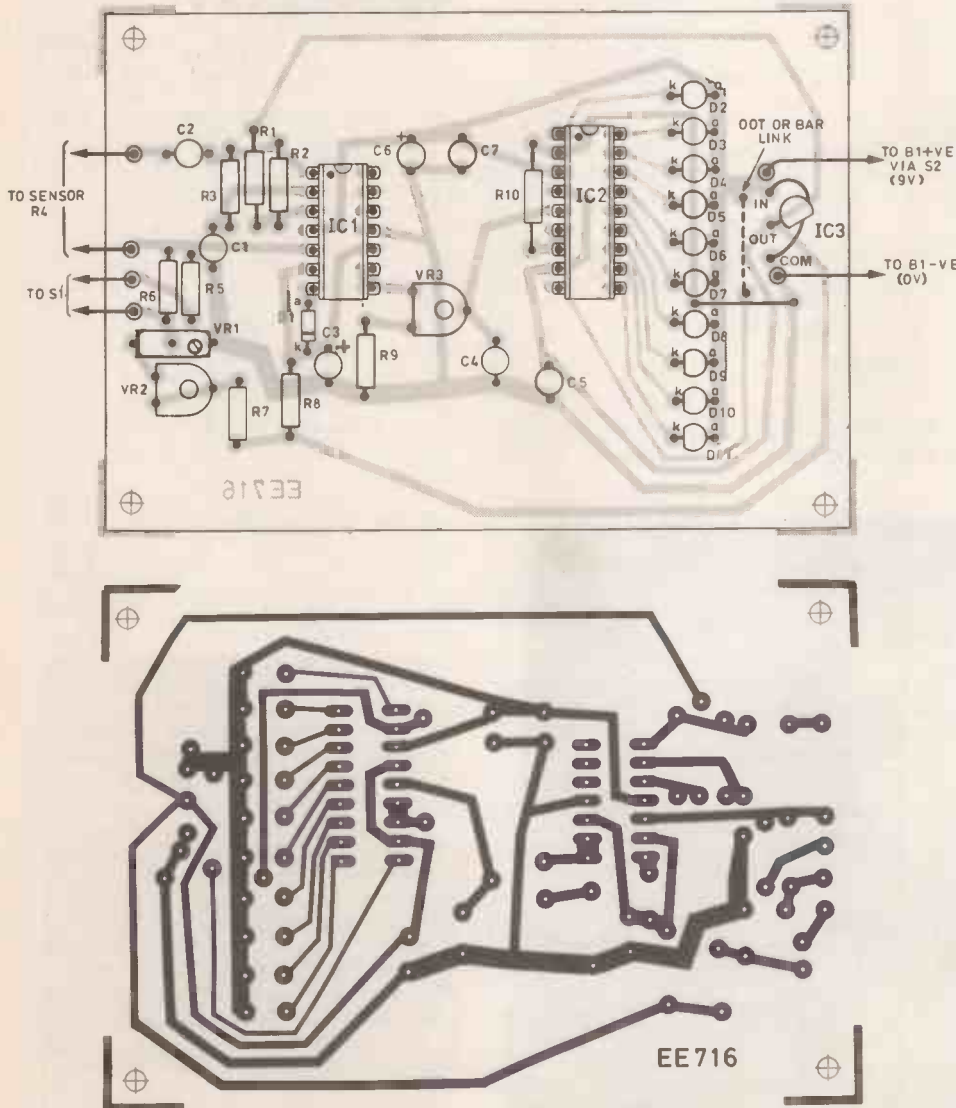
Printed circuit board component layout and full size copper track master pattern
